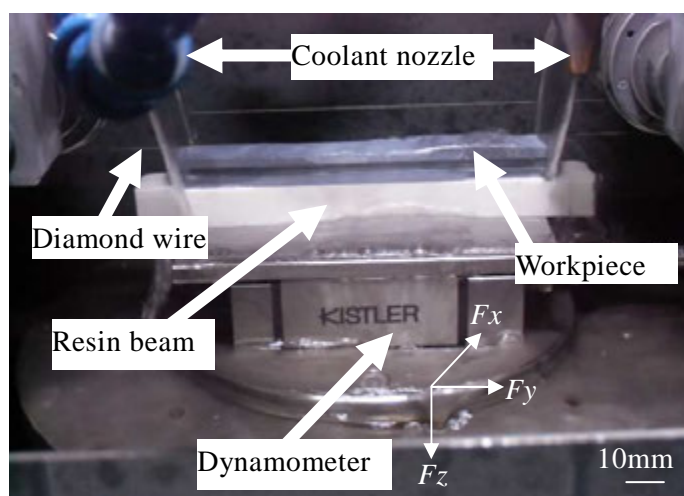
Experiment setup of close-up view of the dicing wire saw
